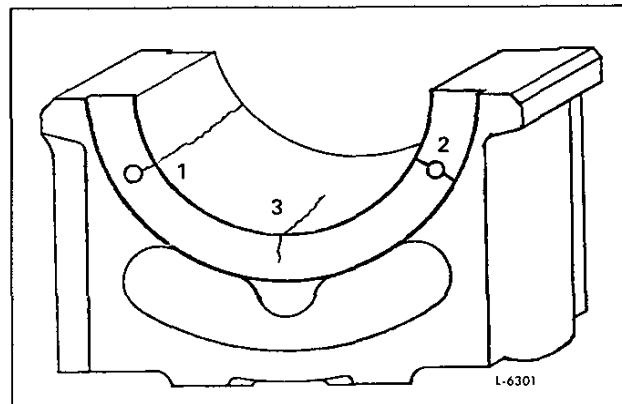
6V Rear Main Bearing Cap Cracks
